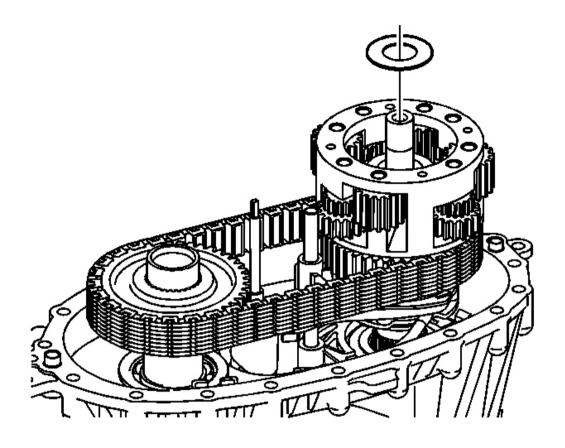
Locating Rear Output Shaft Thrust Washer Courtesy of GENERAL MOTORS CORP.
